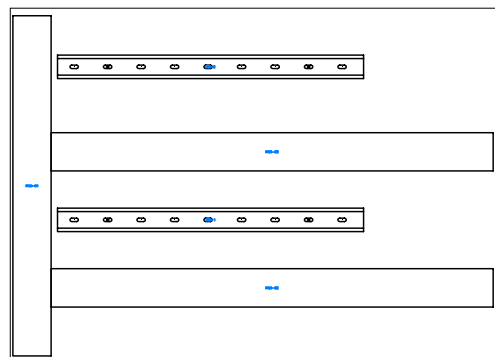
DIN-2 DIN Rail inserted in the drawing
